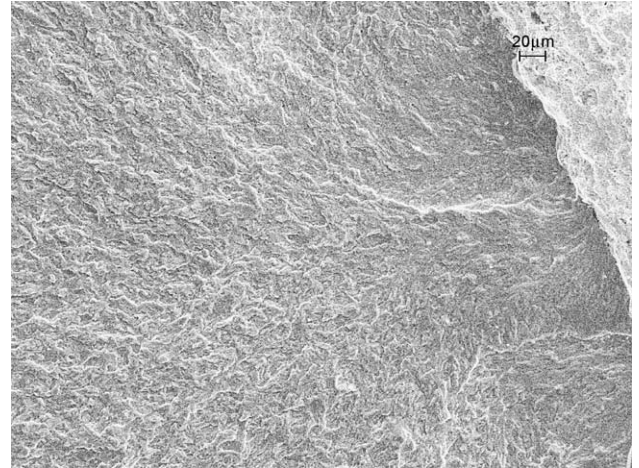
Fracture surface from specimen shot peened and coated with WC–10Co–4Cr.
